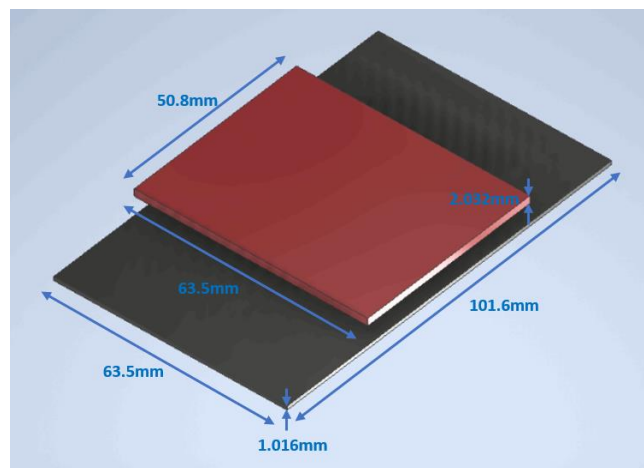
Dimension of the initial charge (red) and the final part (black)
